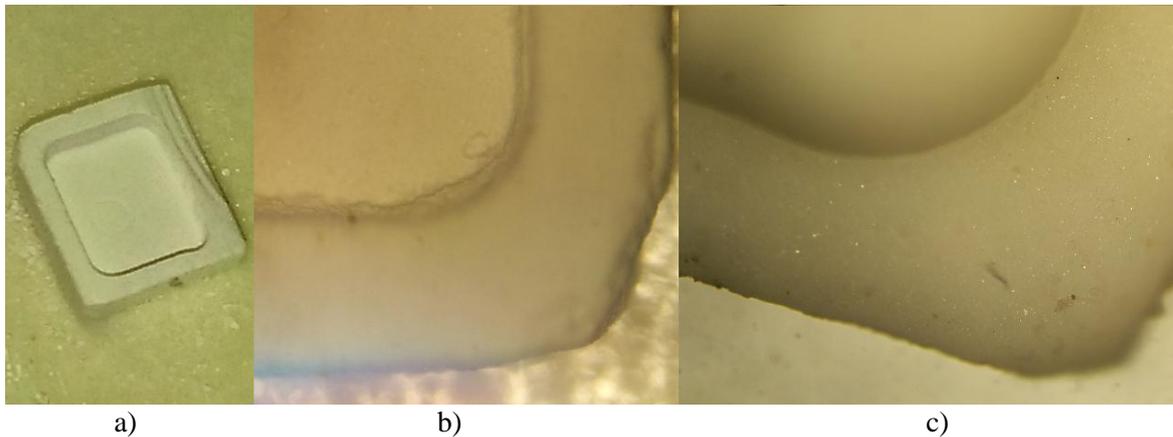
a) Pressed package b) Detail of milled package c) Detail of sintered package
